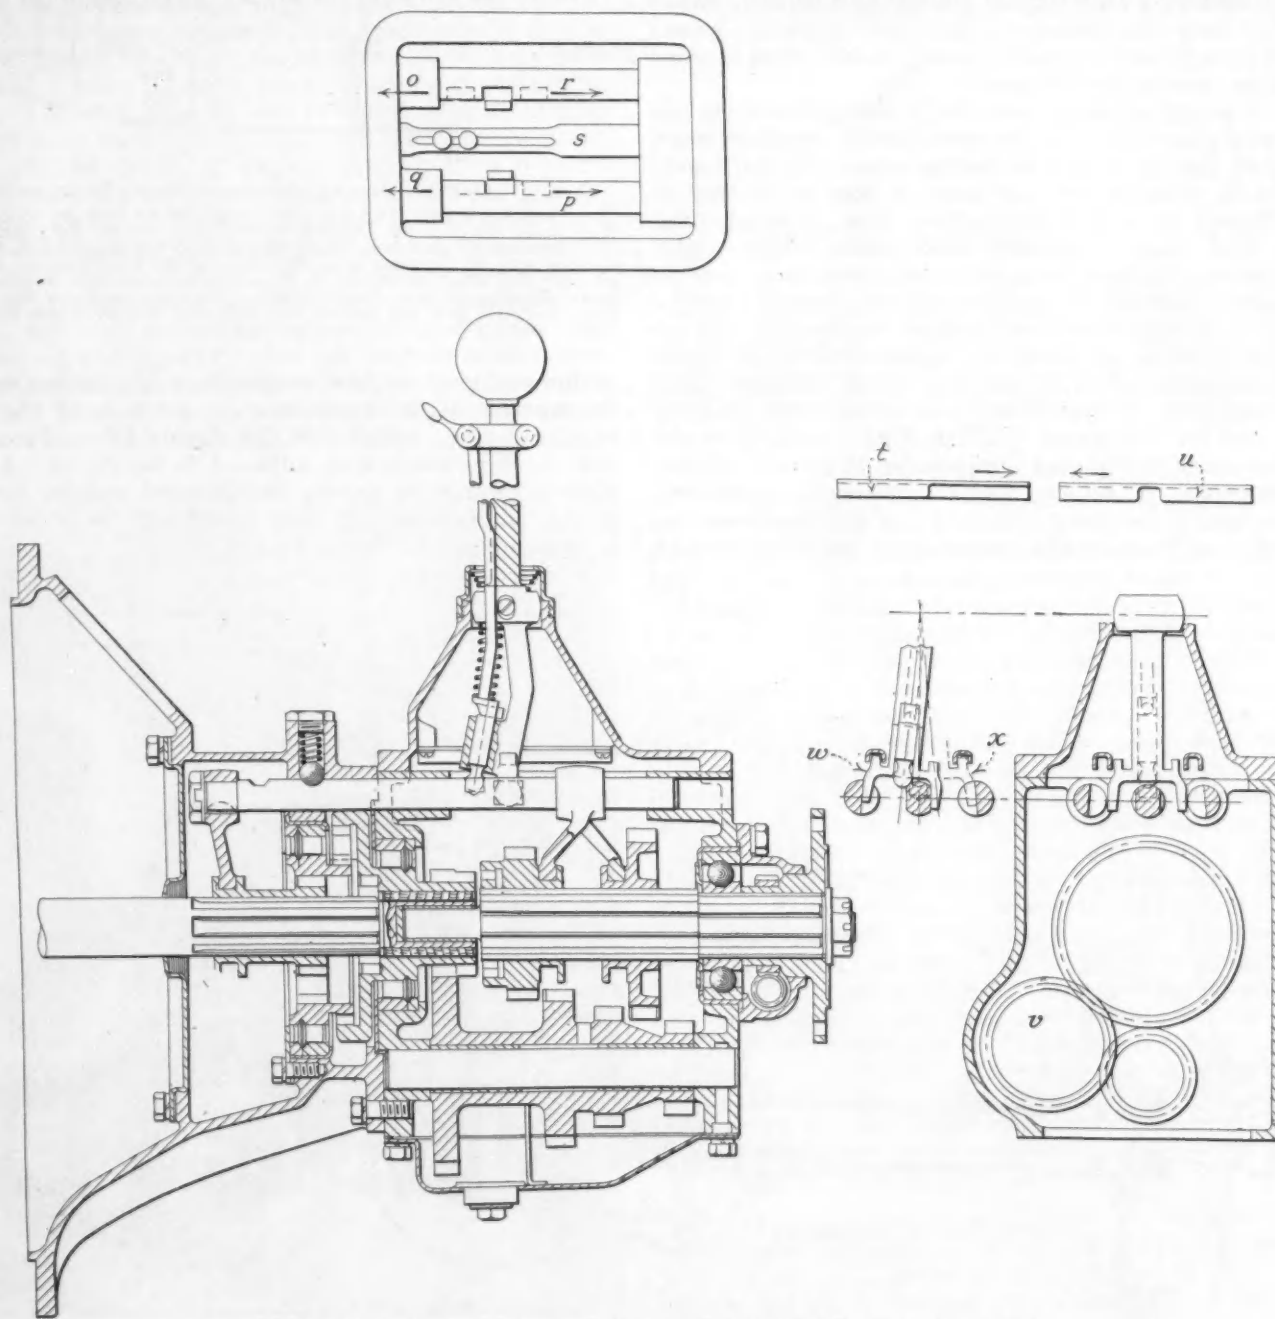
ASSEMBLY VIEWS OF THE FOUR-SPEED TRANSMISSION SHOWN IN FIG. 5.
